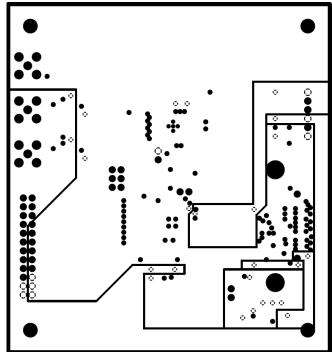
ADS8168 EVM PCB Layer 3: Power Planes
